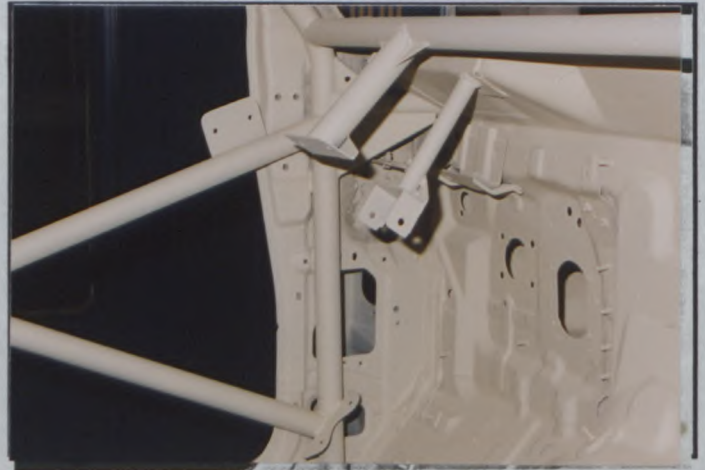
REAR SUPPORT BAR TO FLOOR
